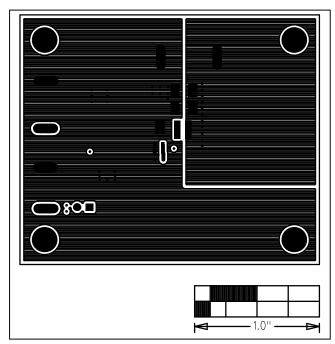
MAXM17516 EV Kit PCB Layout—Solder Side
